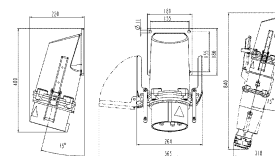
MB 221 Dim. in mm	Amp. Poles	16		32
